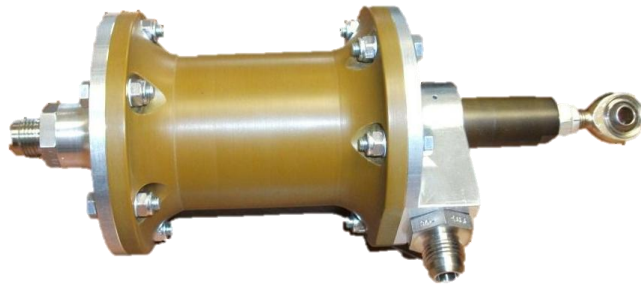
The prototype TORLON actuator. Cylinder is machined from extruded TORLON rod, Piston is injection molded. Front and Back Cover are machined from Aluminum due to low budget.
